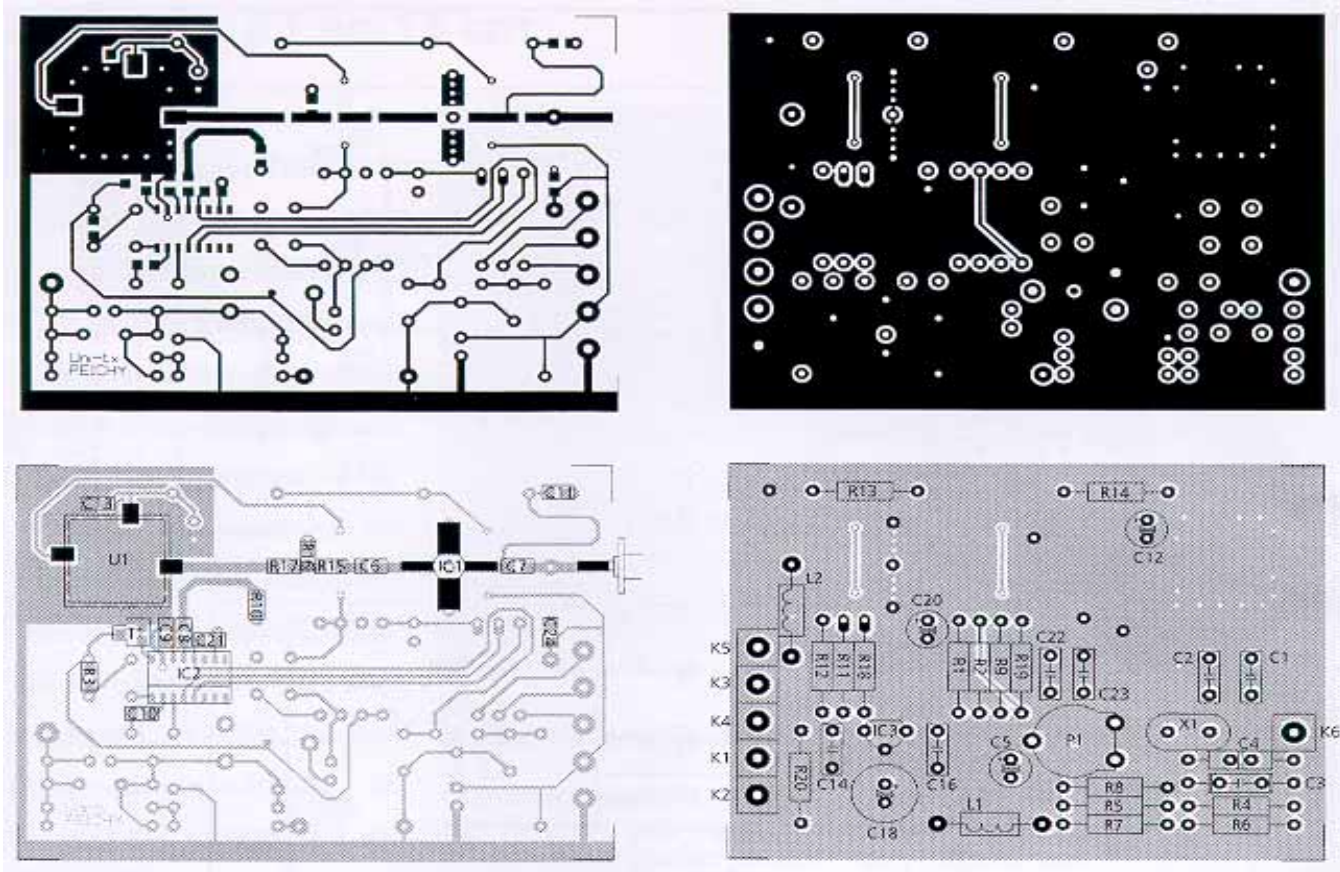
PCB layout and component positioning for the PLL/VCO unit
